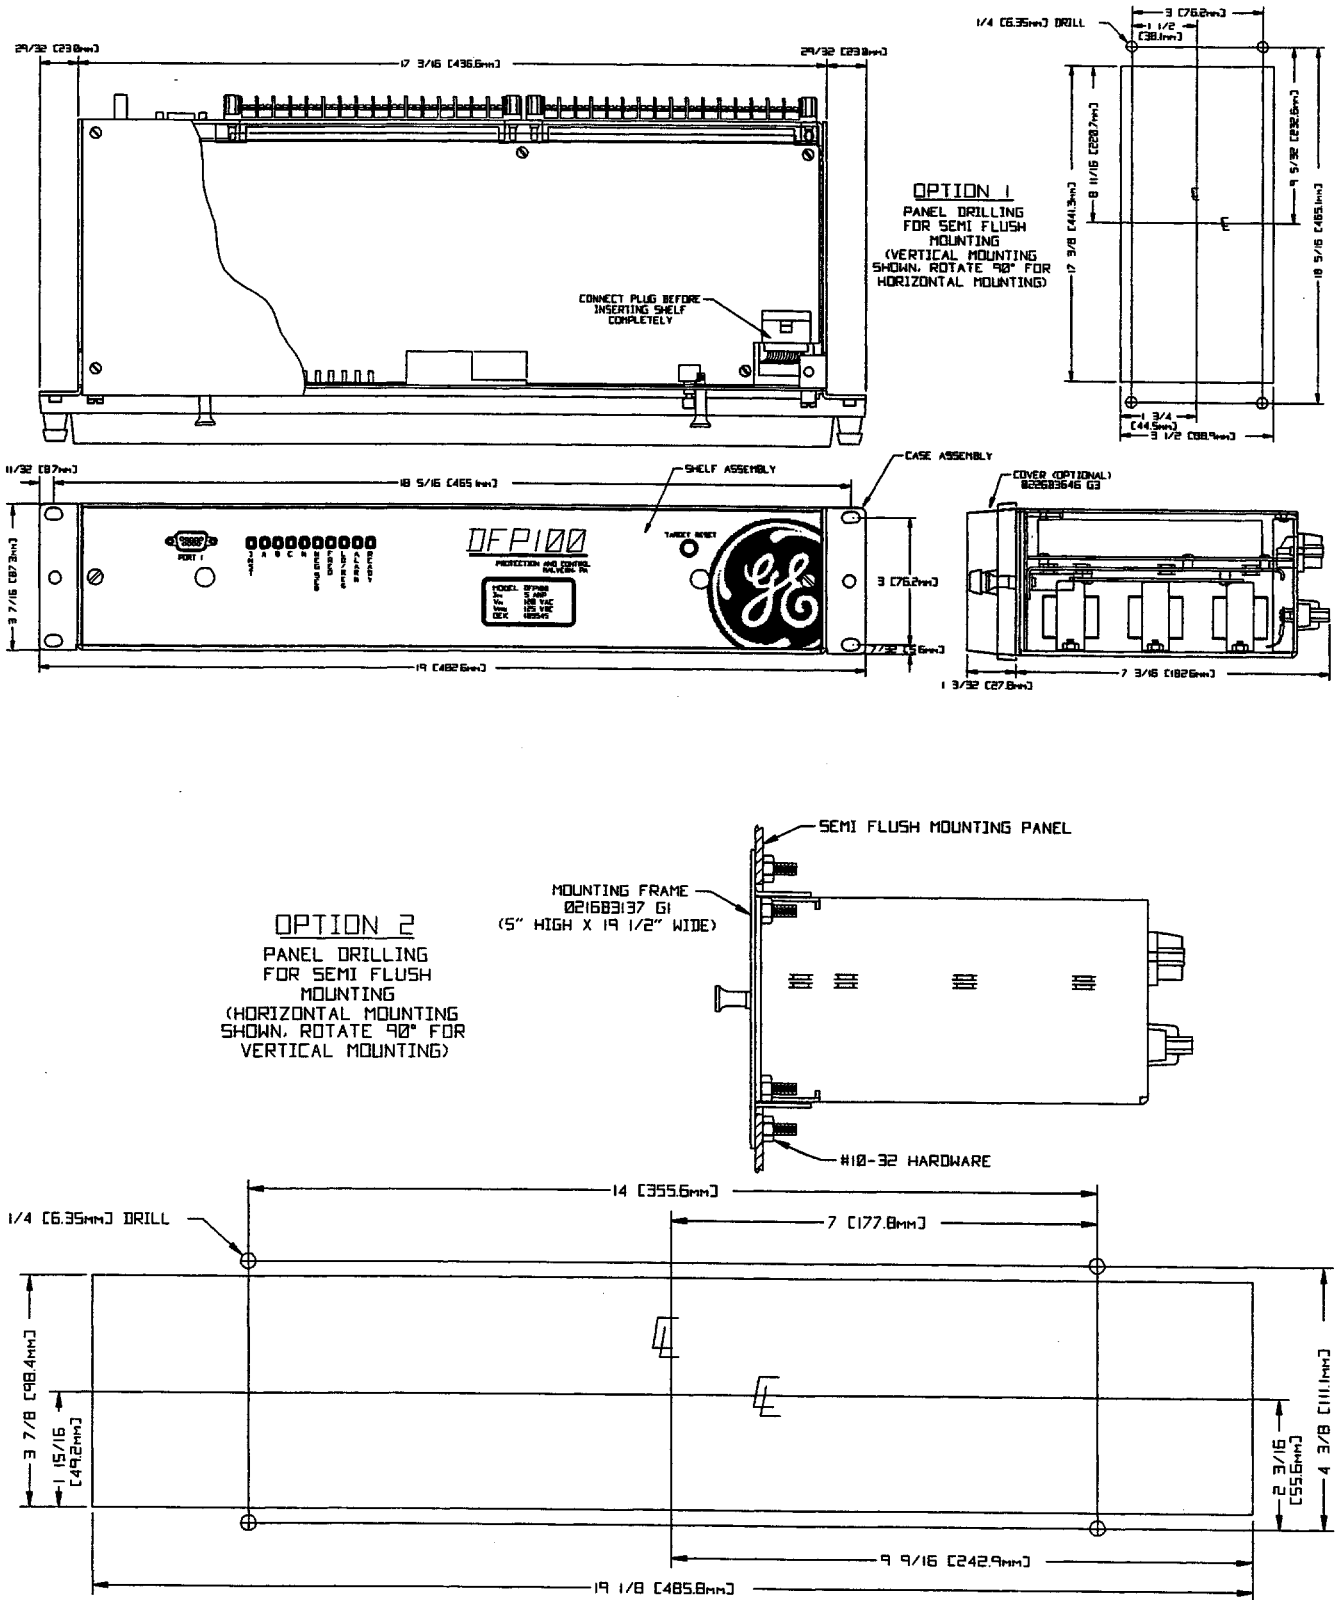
Outline and Panel Drilling Dimensions (0215B8797 [2])
